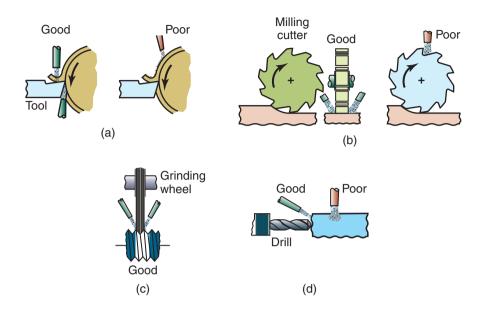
Schematic illustration of the proper methods of applying cutting fluids (flooding) in various machining operations: (a) turning, (b) milling, (c) thread grinding, and (d) drilling.
